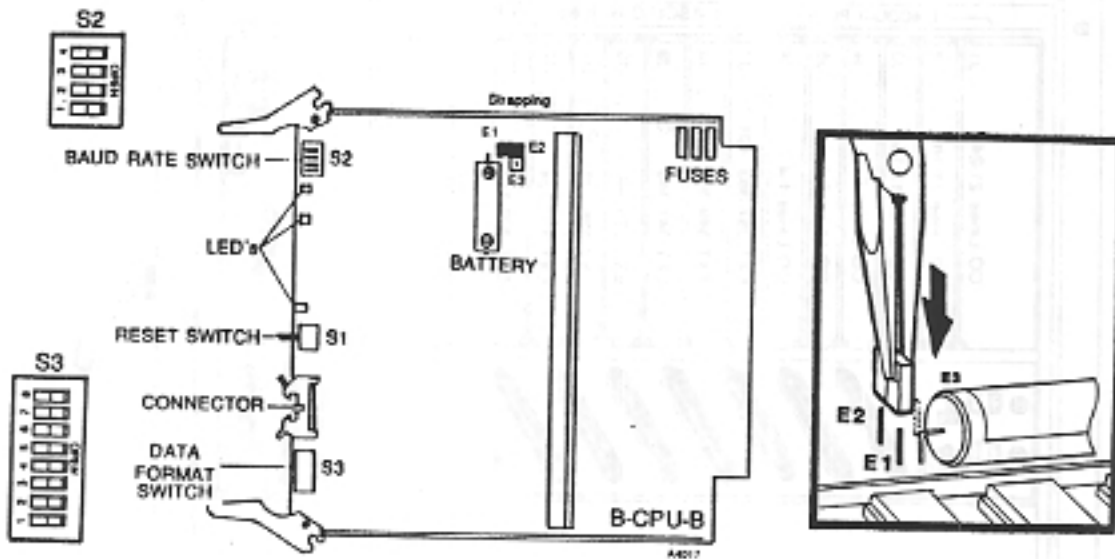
CENTRAL PROCESSING UNIT ( B-CPU-B ) PCB
